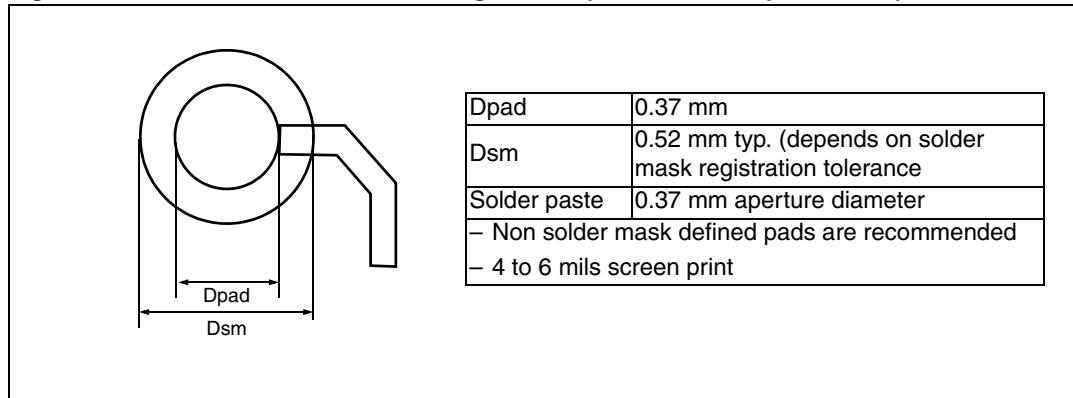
Recommended PCB design rules (0.80/0.75 mm pitch BGA)
